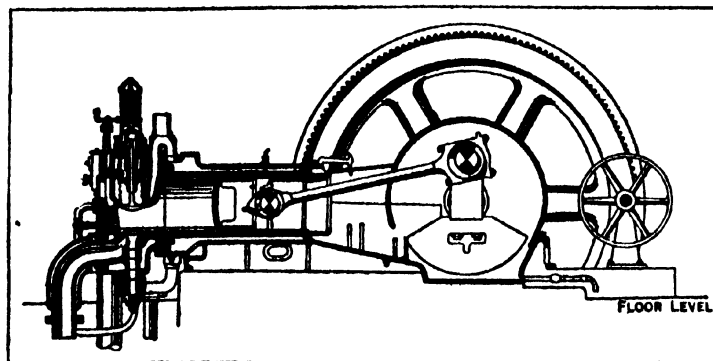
CROSSLEY HORIZONTAL GAS ENGINE; SECTIONAL VIEW
